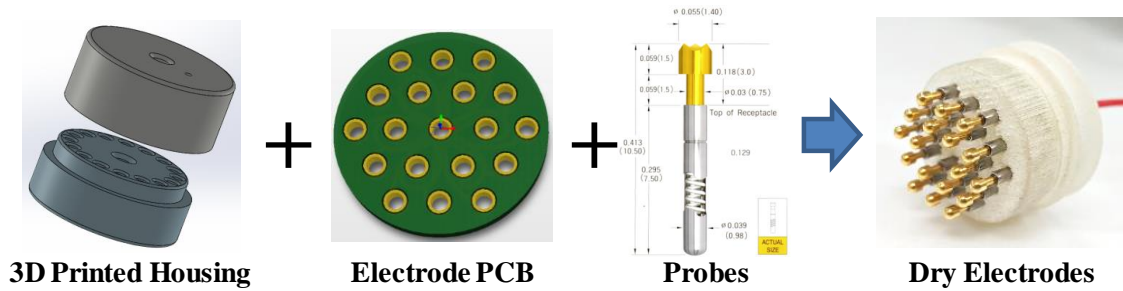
Component and assembled prototype images of a dry electrode for EEG measurements
